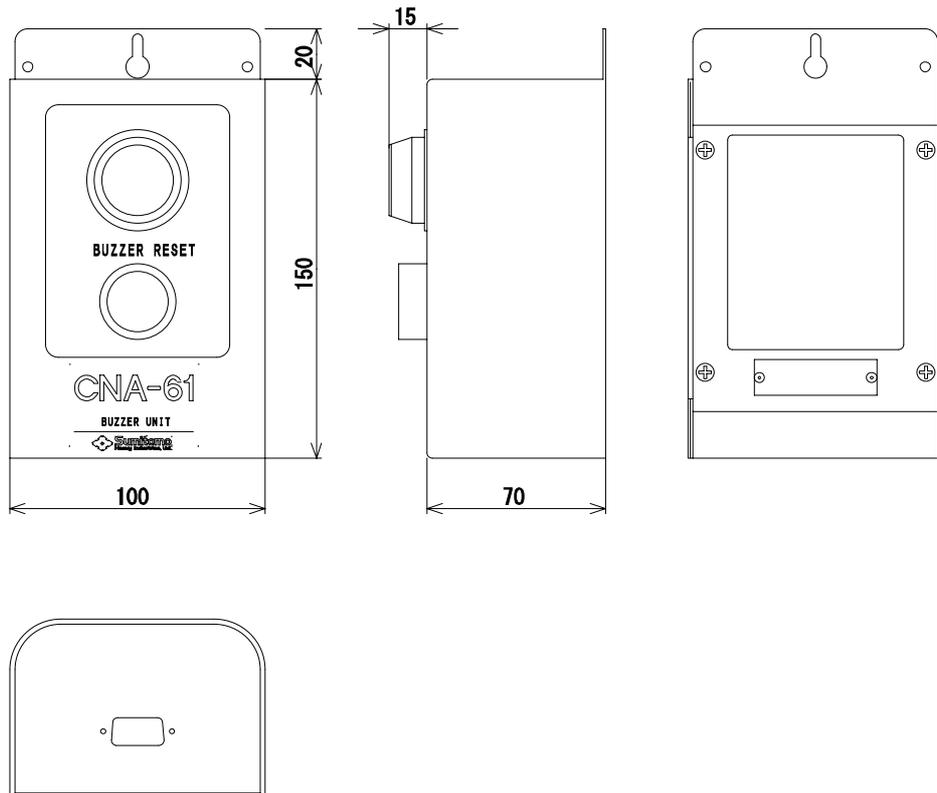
OUTLINE VIEW OF BUZZER UNIT
